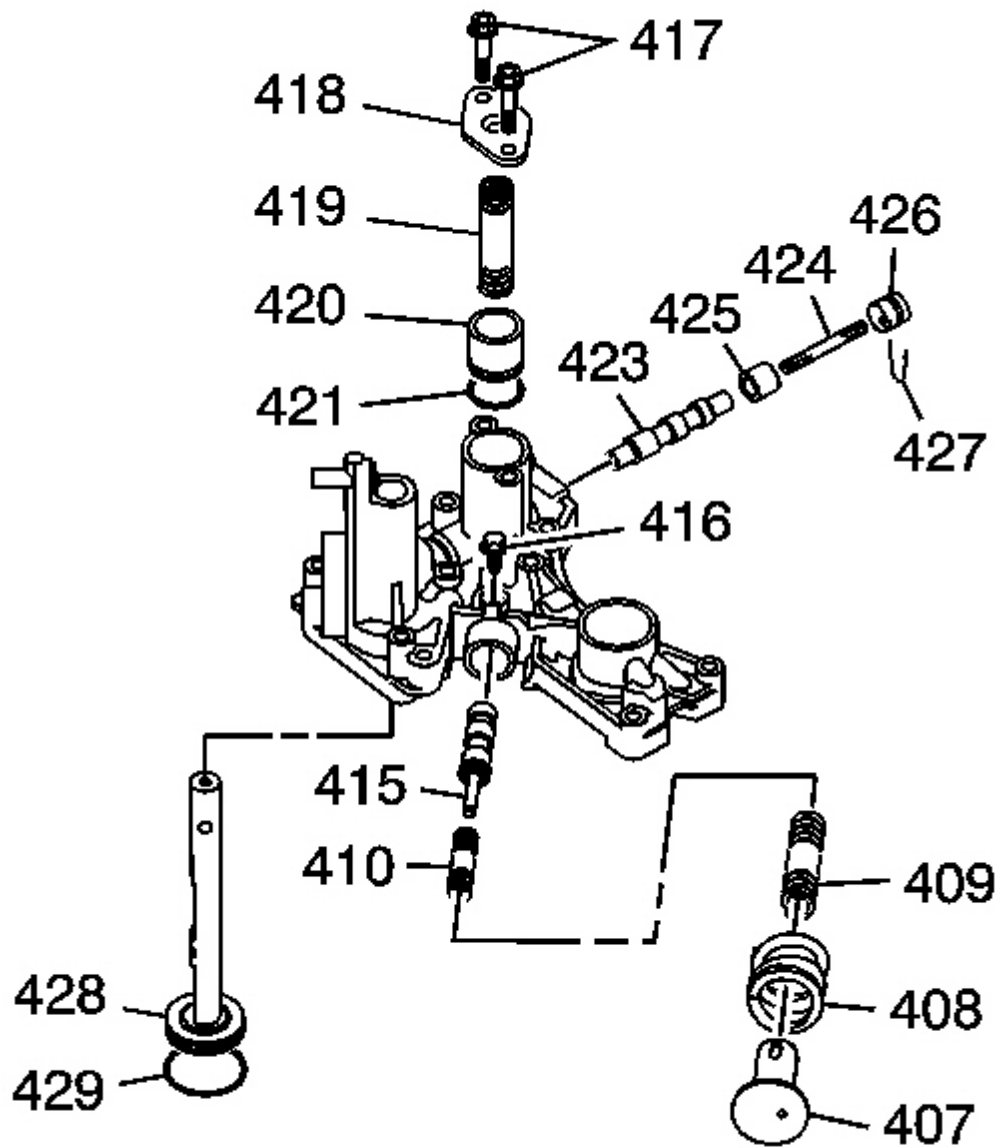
3rd Accumulator Piston Bore Cover Bolts & Components
